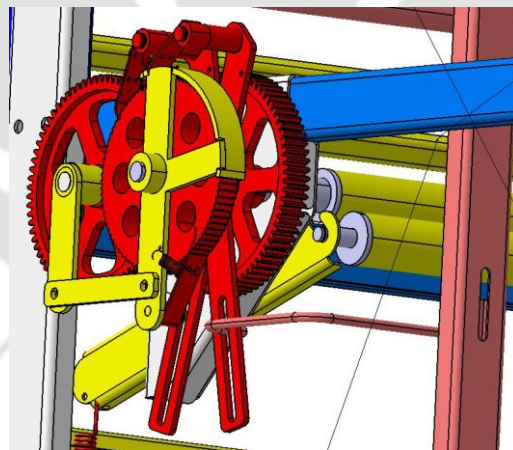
5-Wheel gear mechanism isometric view of De-sign semi-automatic handloom
